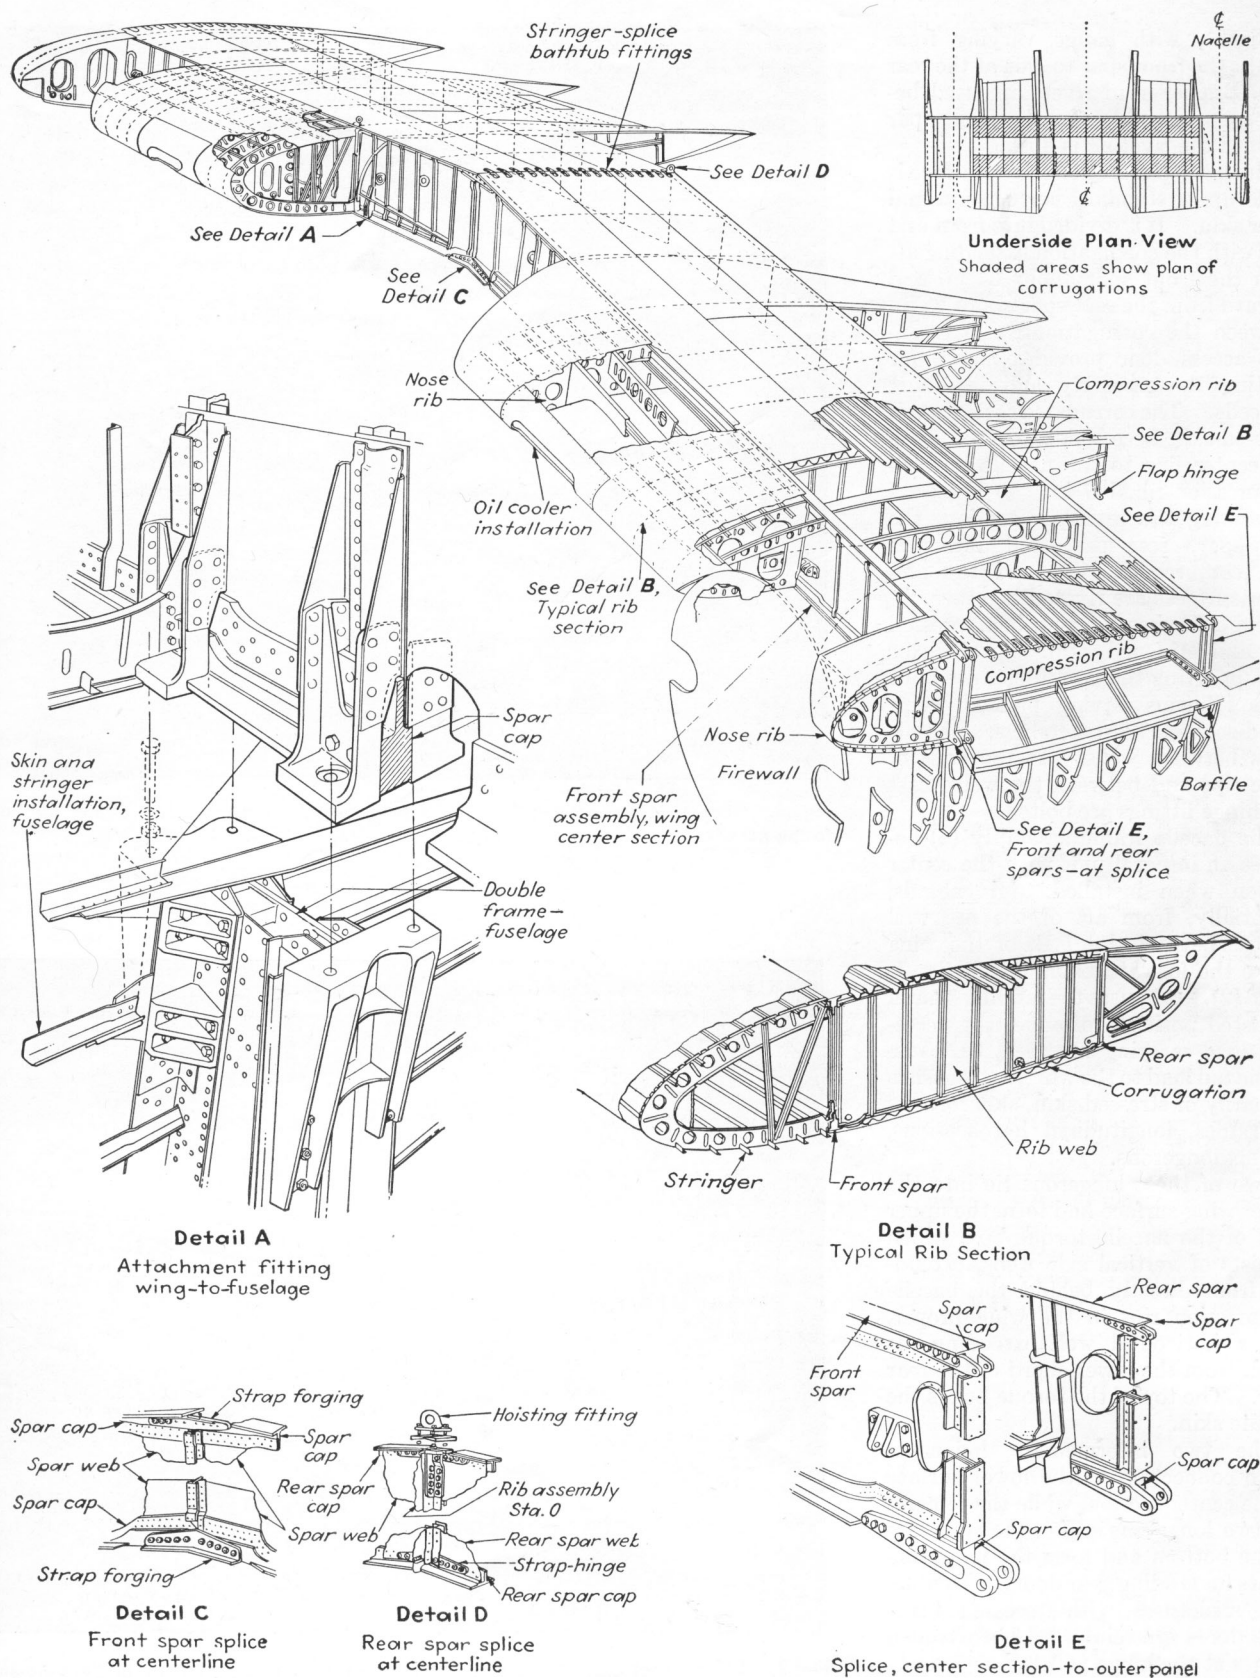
Structural details of the wing center section. The underside plan view at the upper right shows corrugation areas (shaded). The wing-to-fuselage fitting is being replaced by a forged channel.
